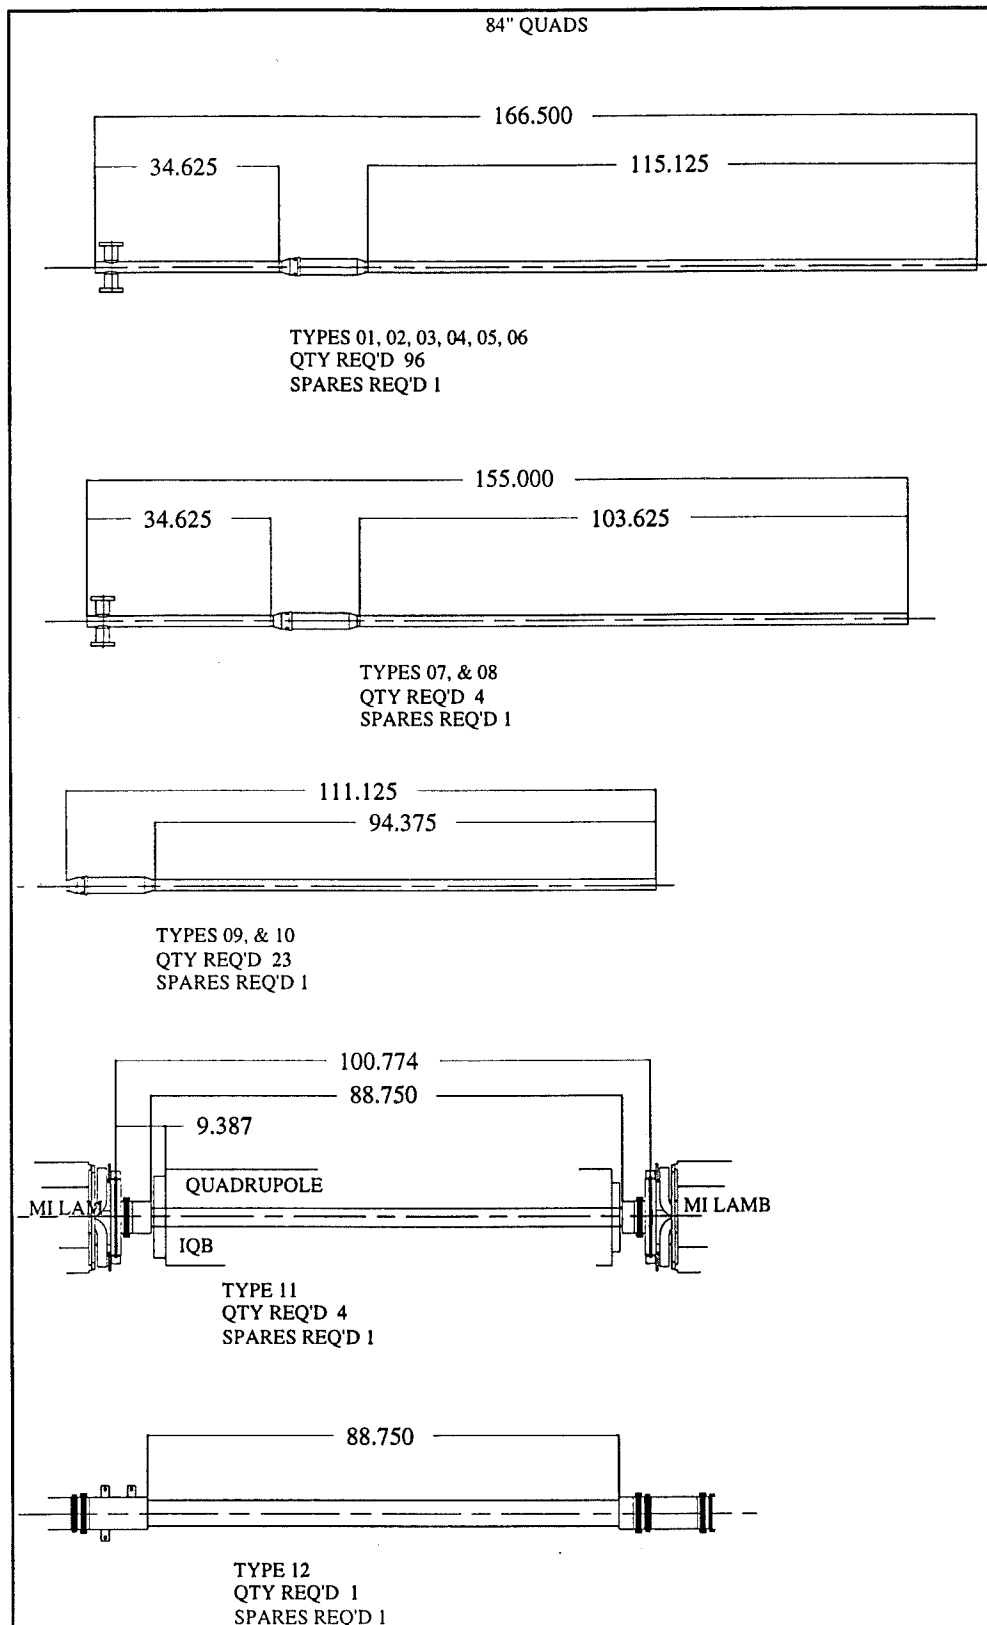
Quadrupole Beam Pipe Assembly.
